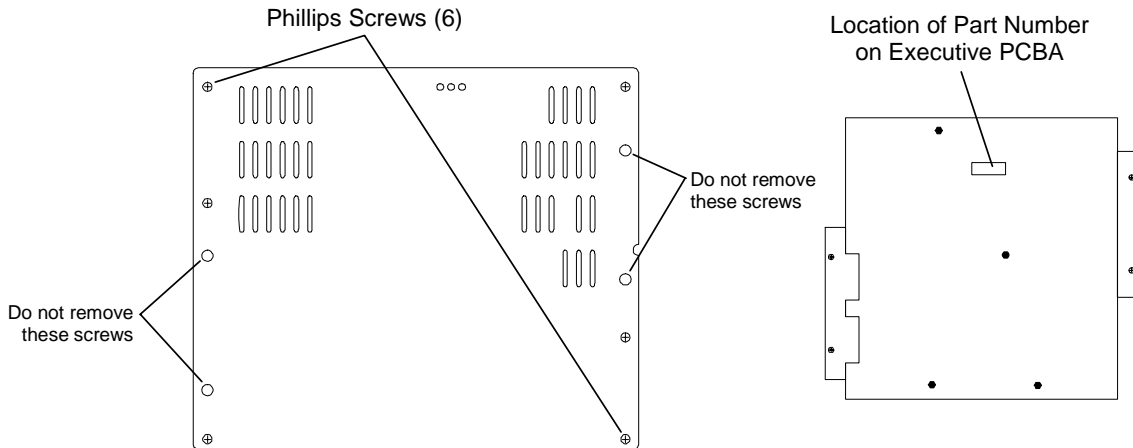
Rear Service Panel and PCBA Part Number Location
